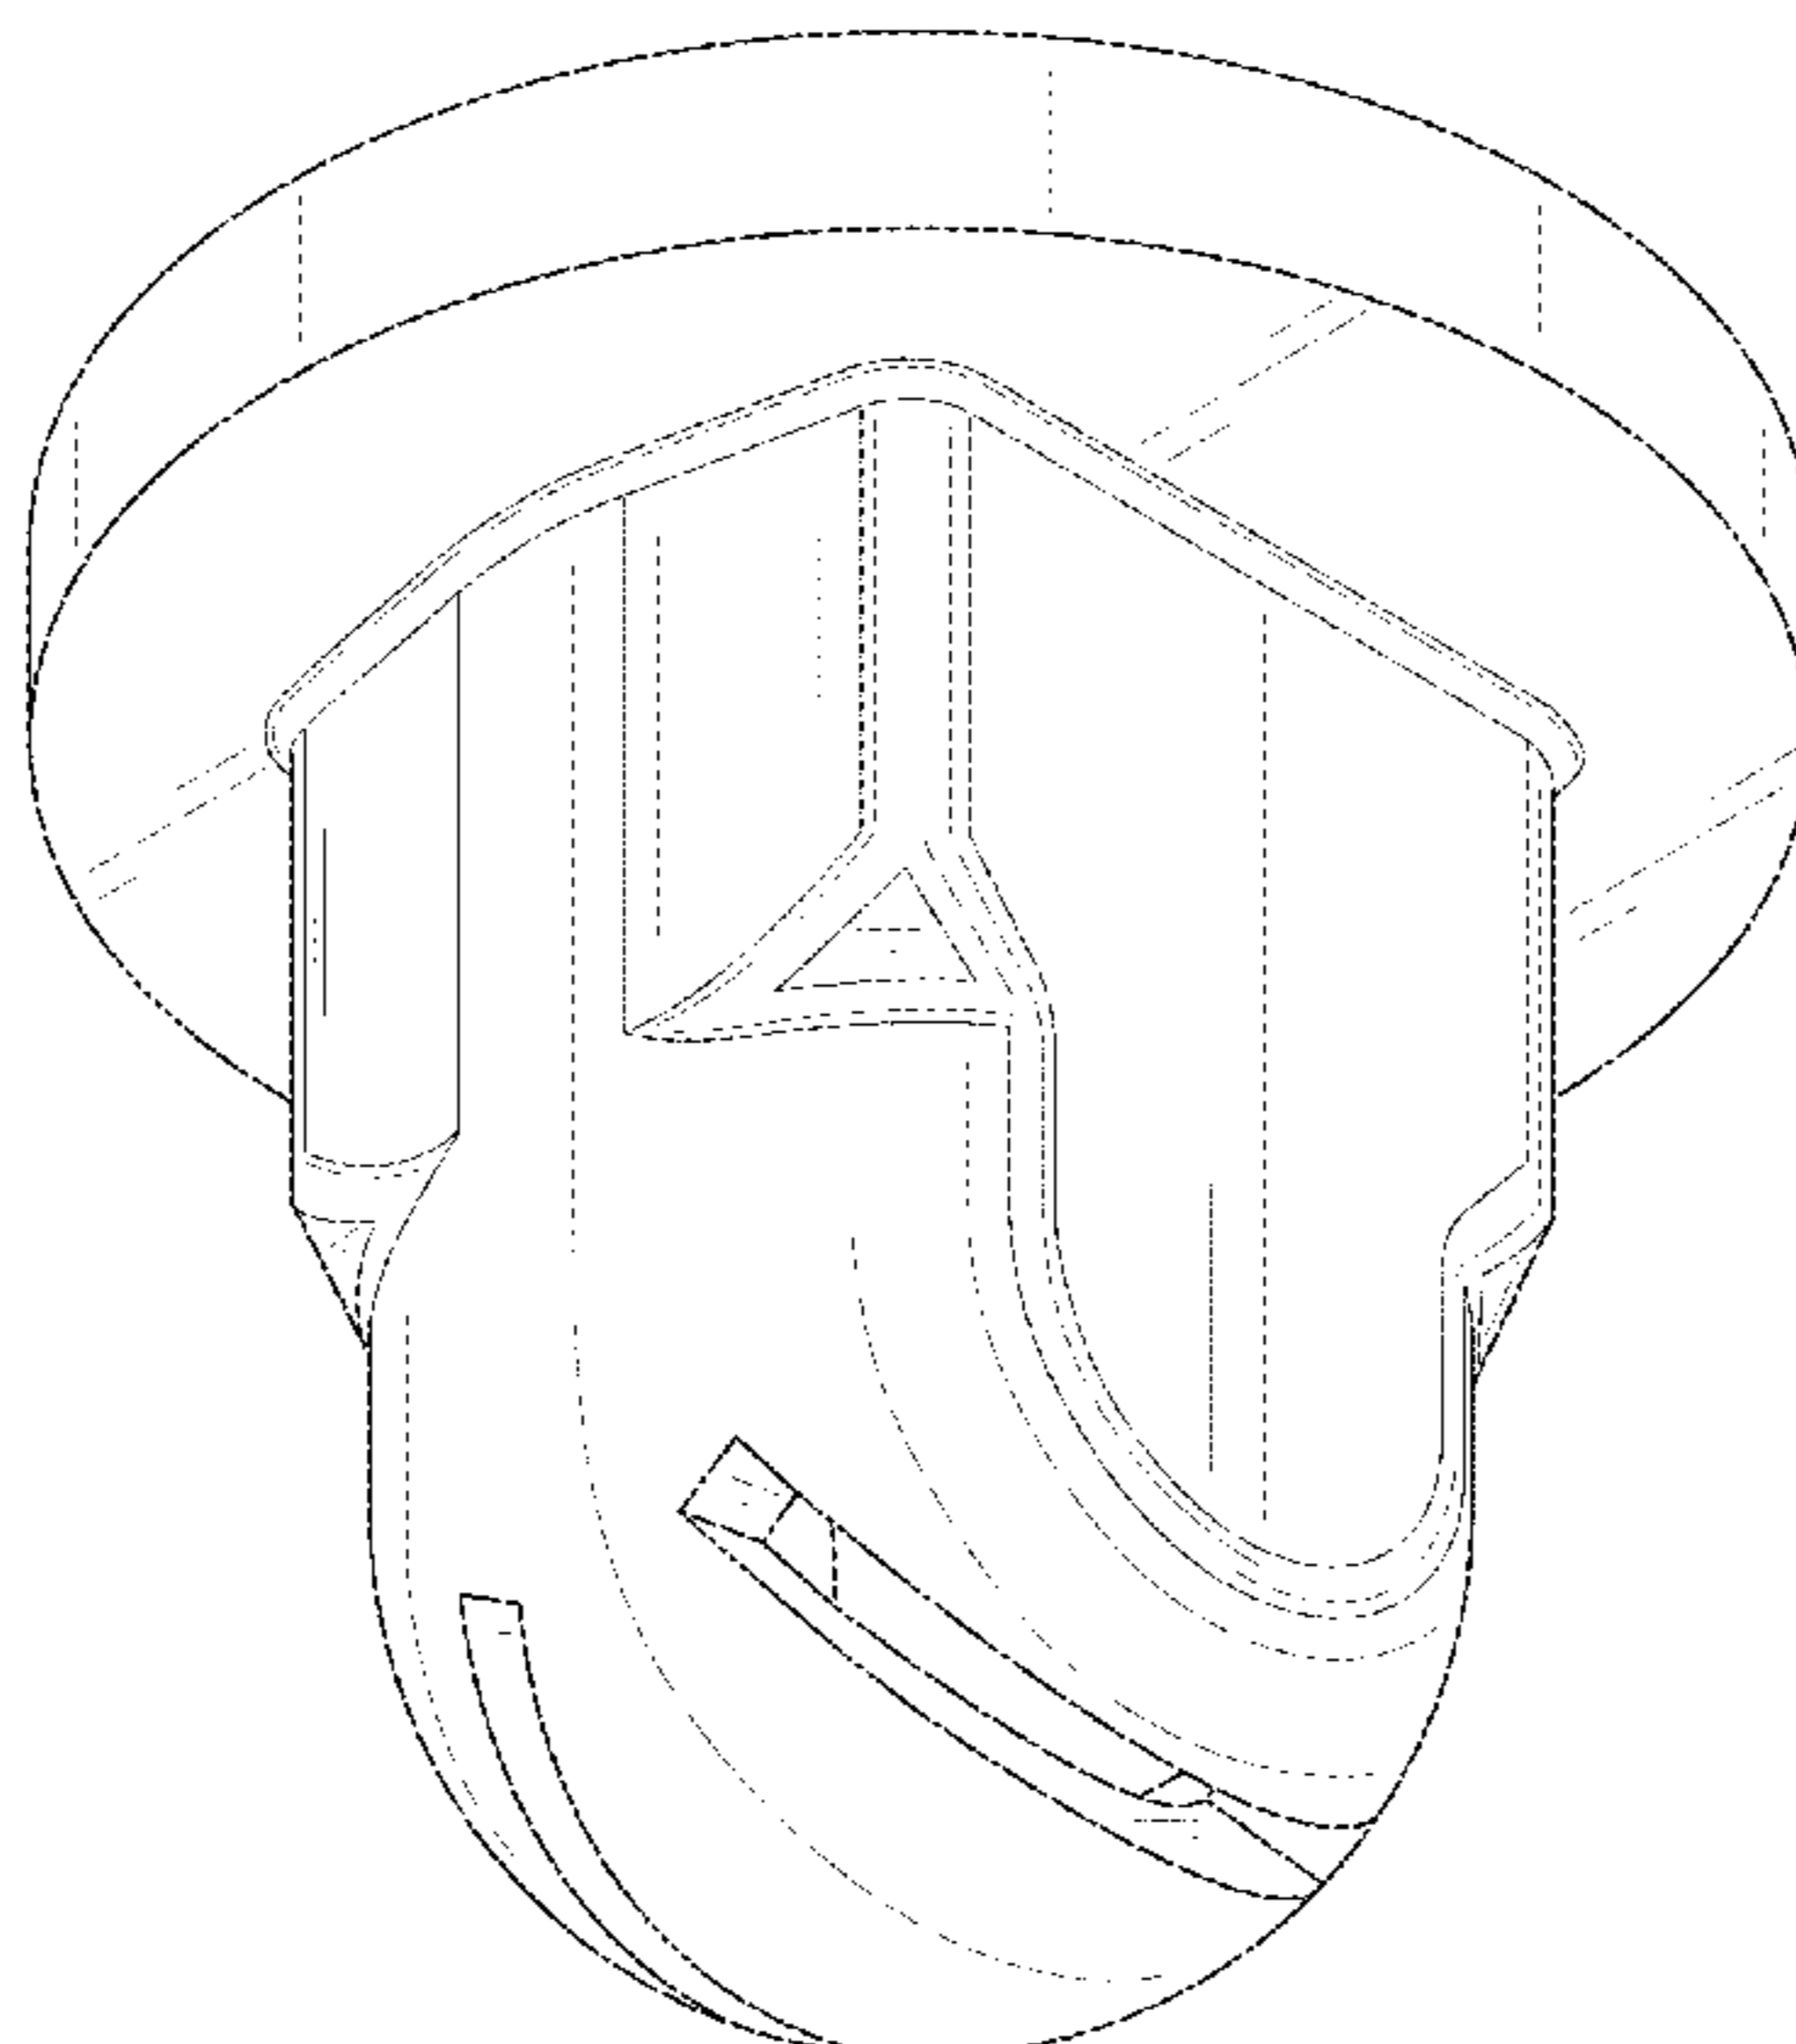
is a left side elevation view of the spray nozzle of FIG. 1.
